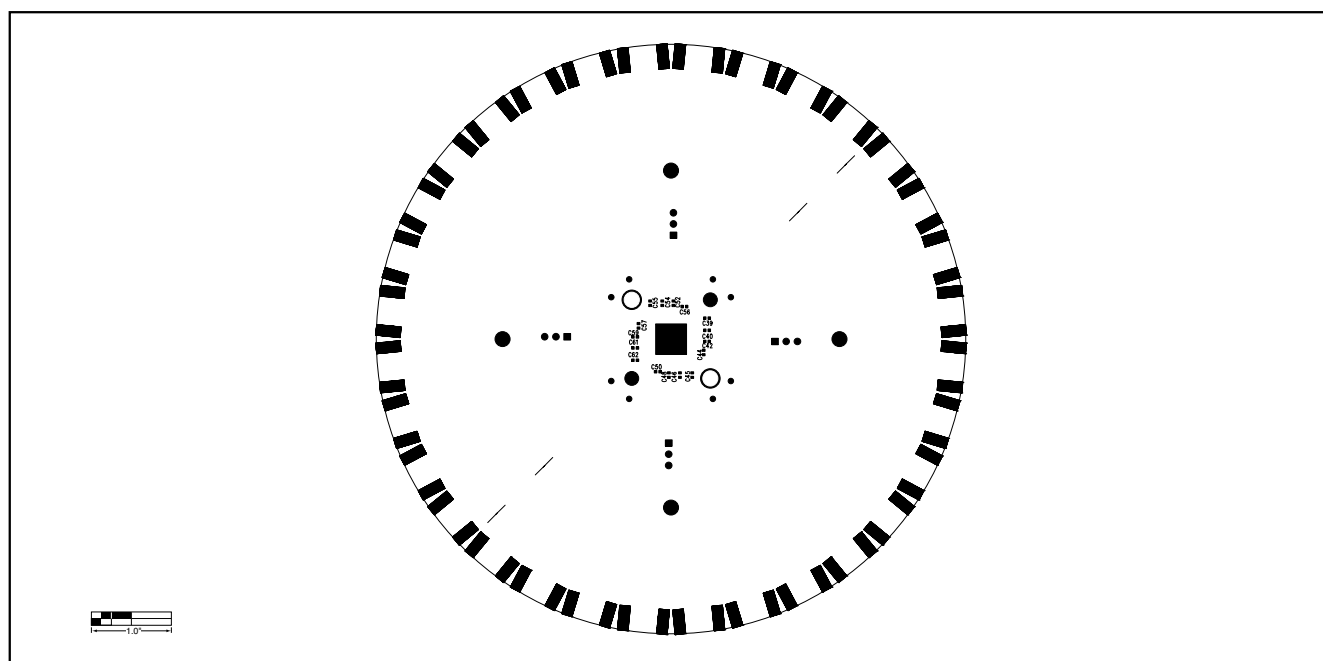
MAX3802 EV Kit Component Placement Guide—Solder Side
